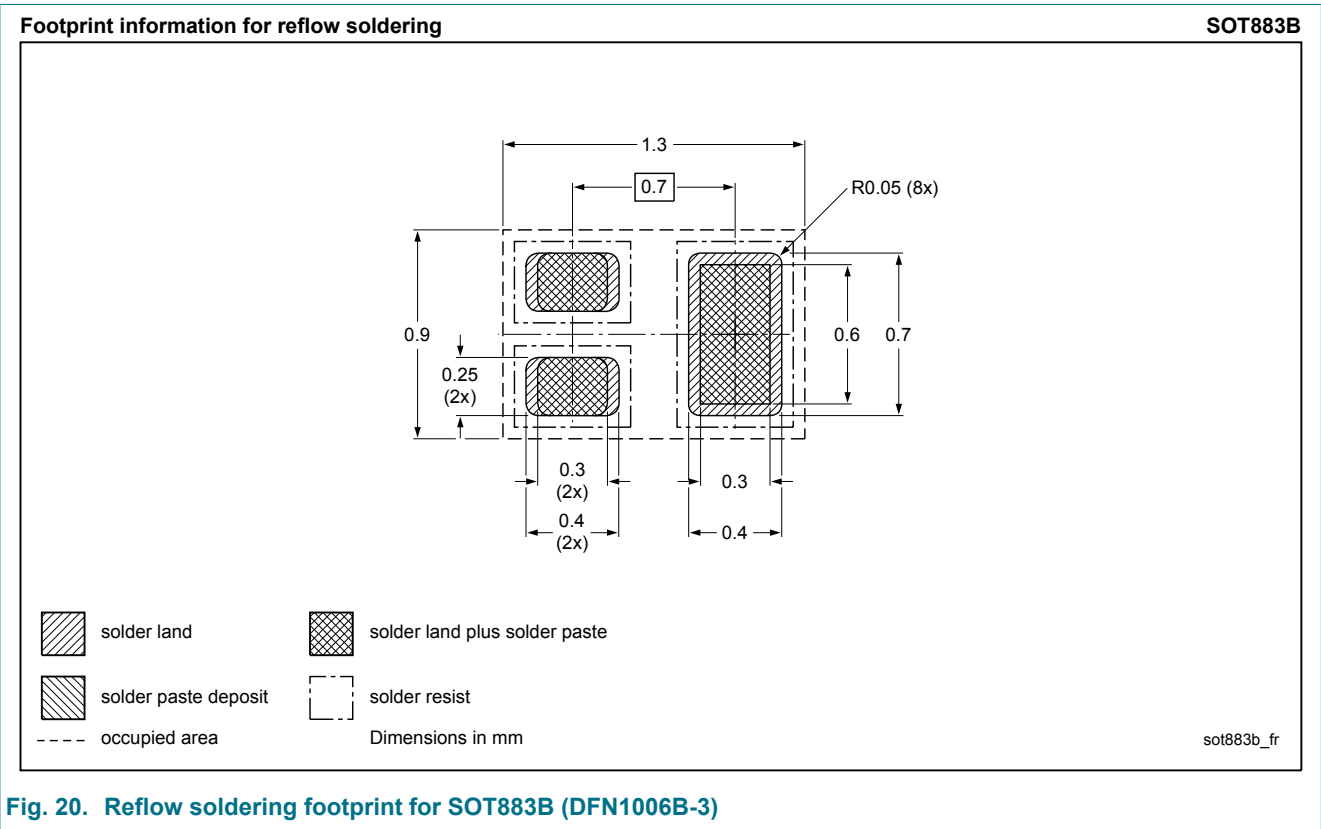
Reflow soldering footprint for SOT883B (DFN1006B-3)
